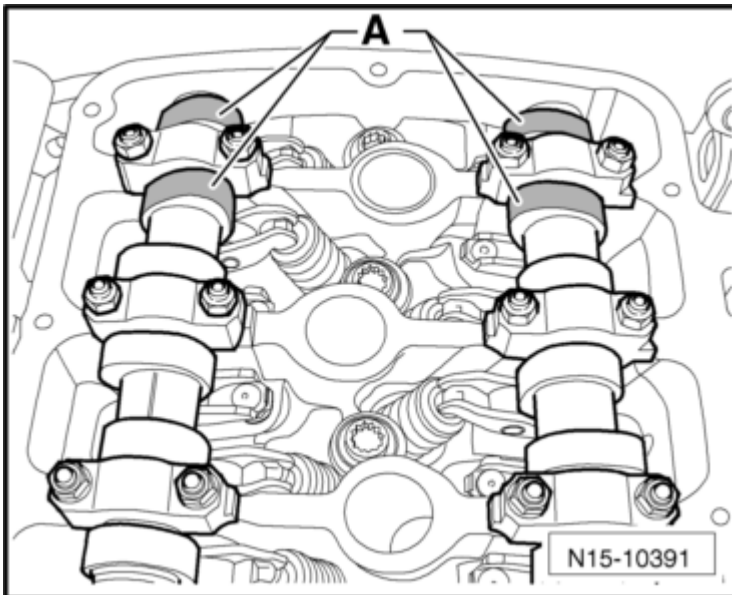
Camshaft Lobes For Cylinder Facing Each Other
